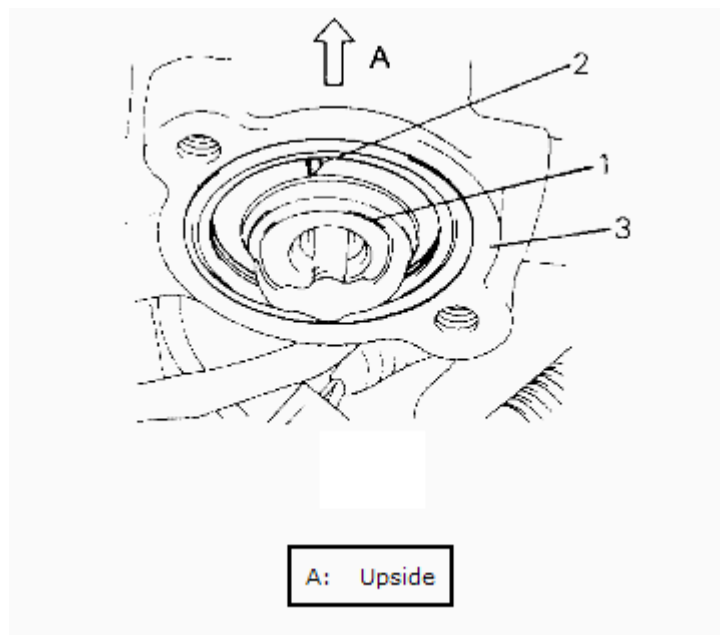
Thermostat, Air Bleed Valve & Thermostat Case
